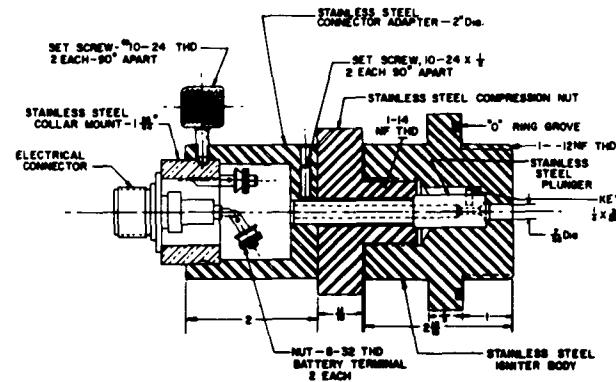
DESIGN DETAILS OF HIGH-PRESSURE EXPLODING WIRE IGNITER
